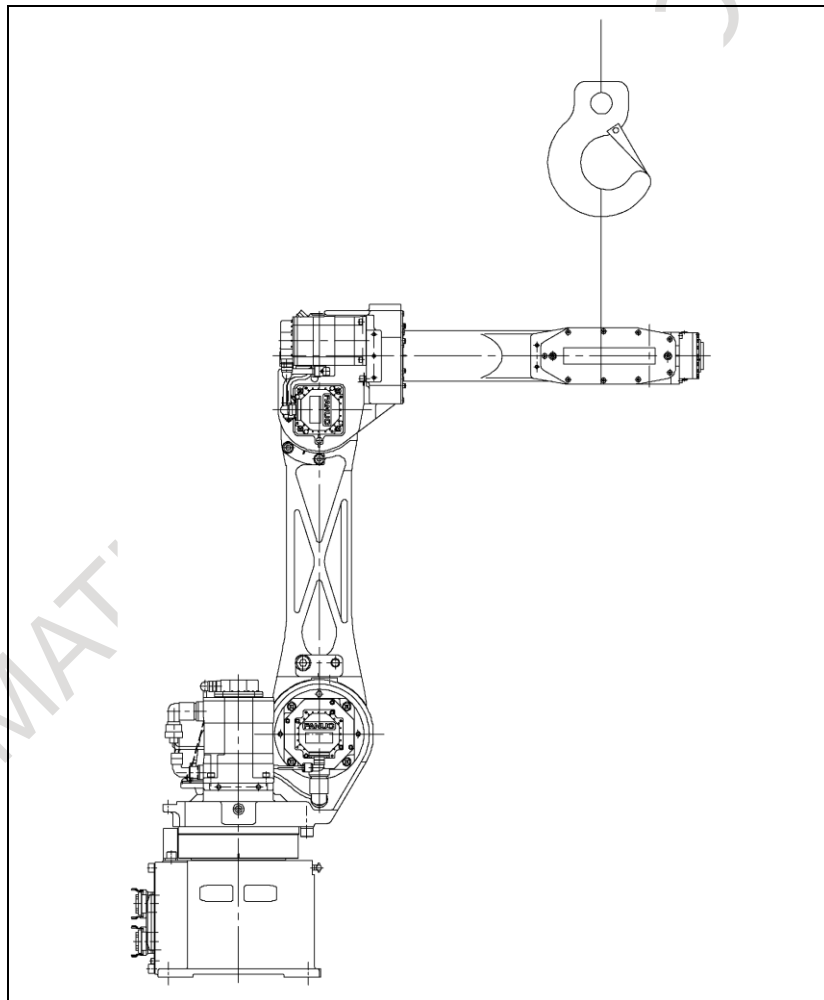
(a) Releasing the brakes of the J2-axis motor
